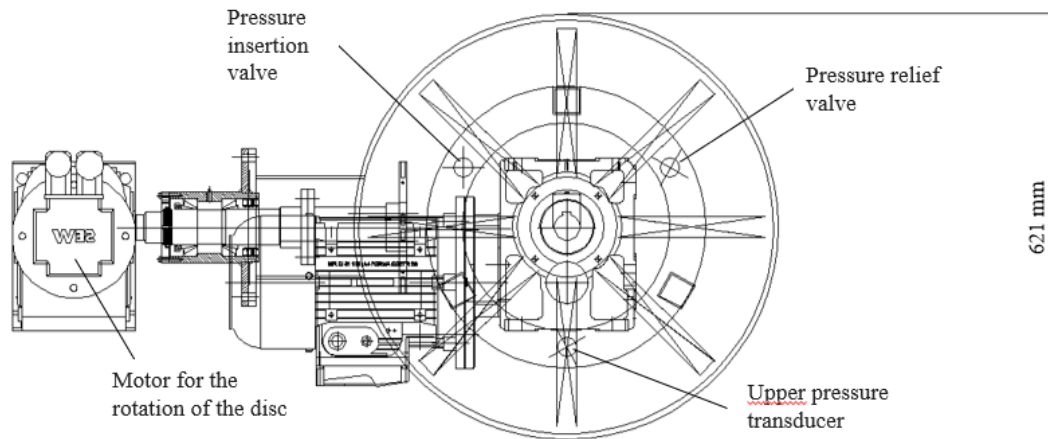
Construction details of the Pressurized Rotating Mixer (top view).
